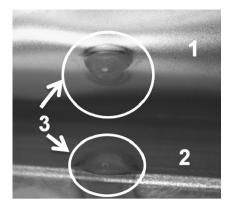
The view of the weld nugget after destructive testing of welded joint-improper joint (sticking); 1) steel sheet, 2) closed profile, 3) place of contact point.
